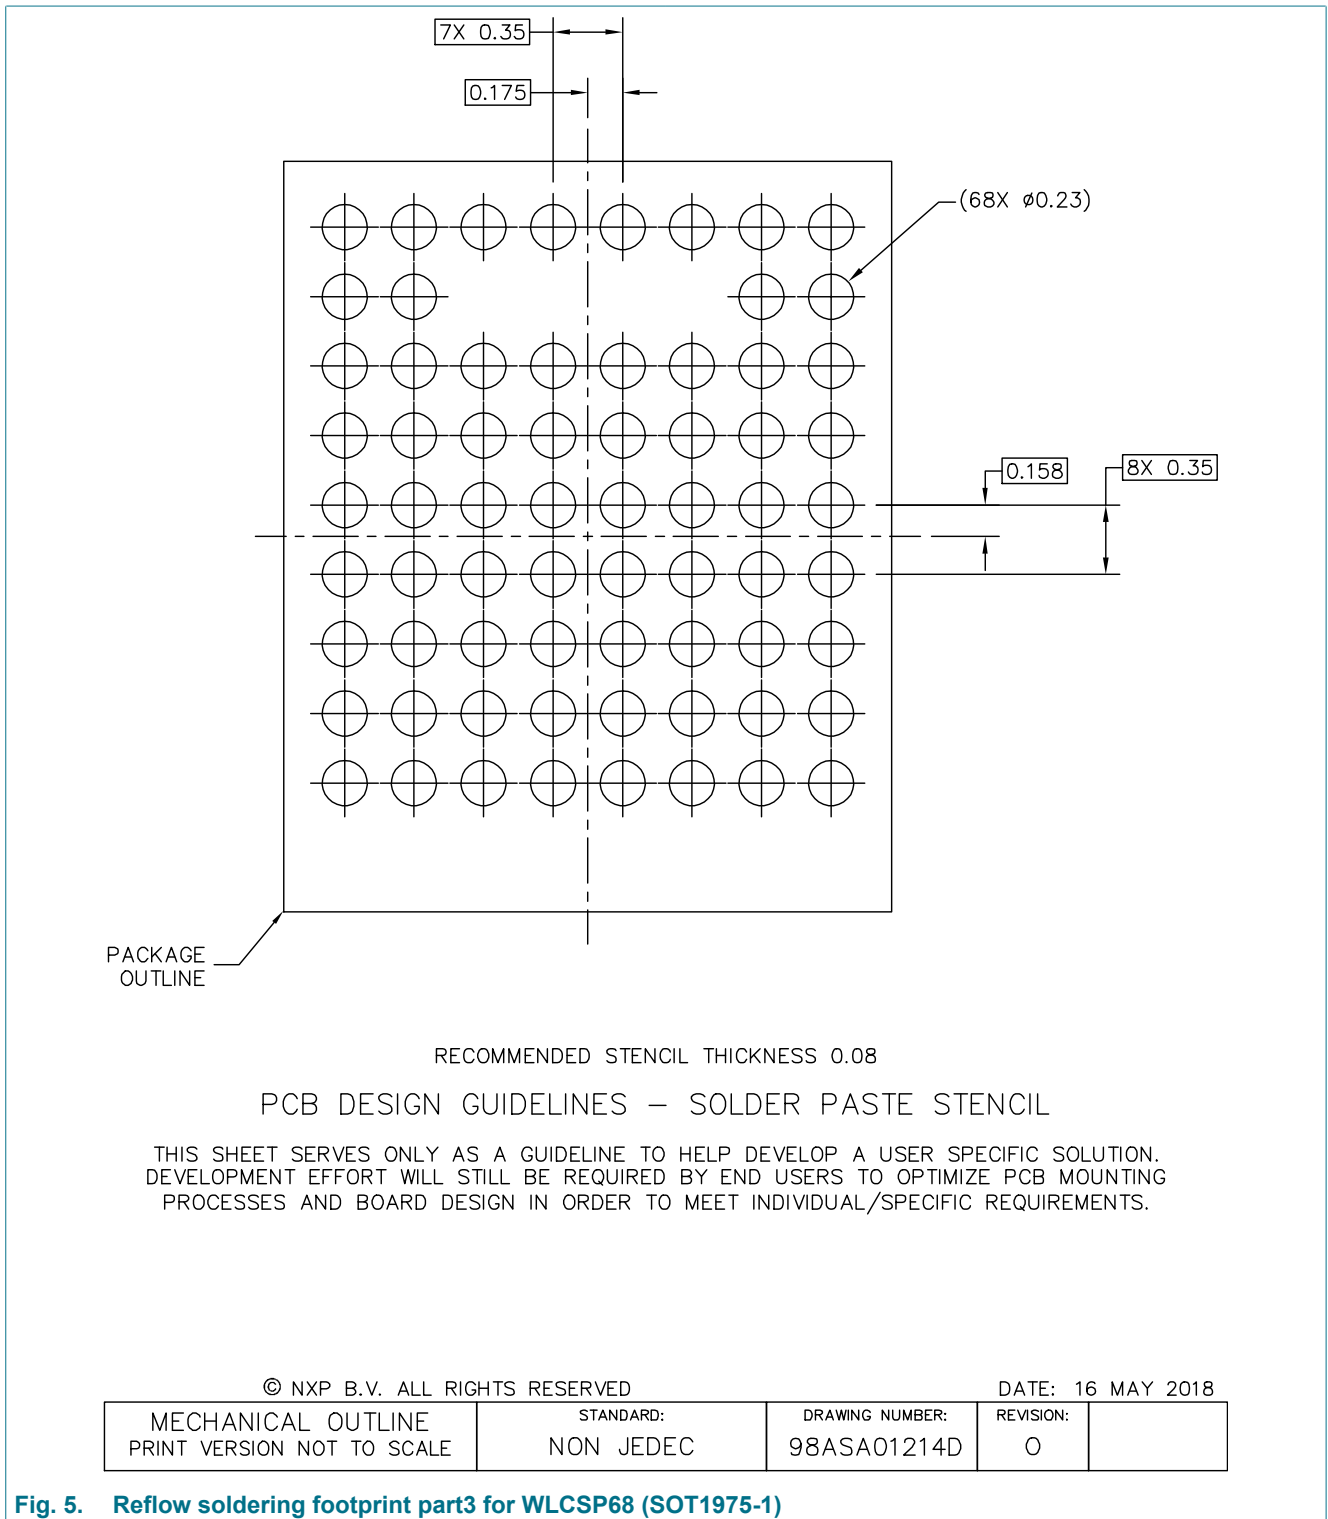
Reflow soldering footprint part3 for WLCSP68 (SOT1975-1)
